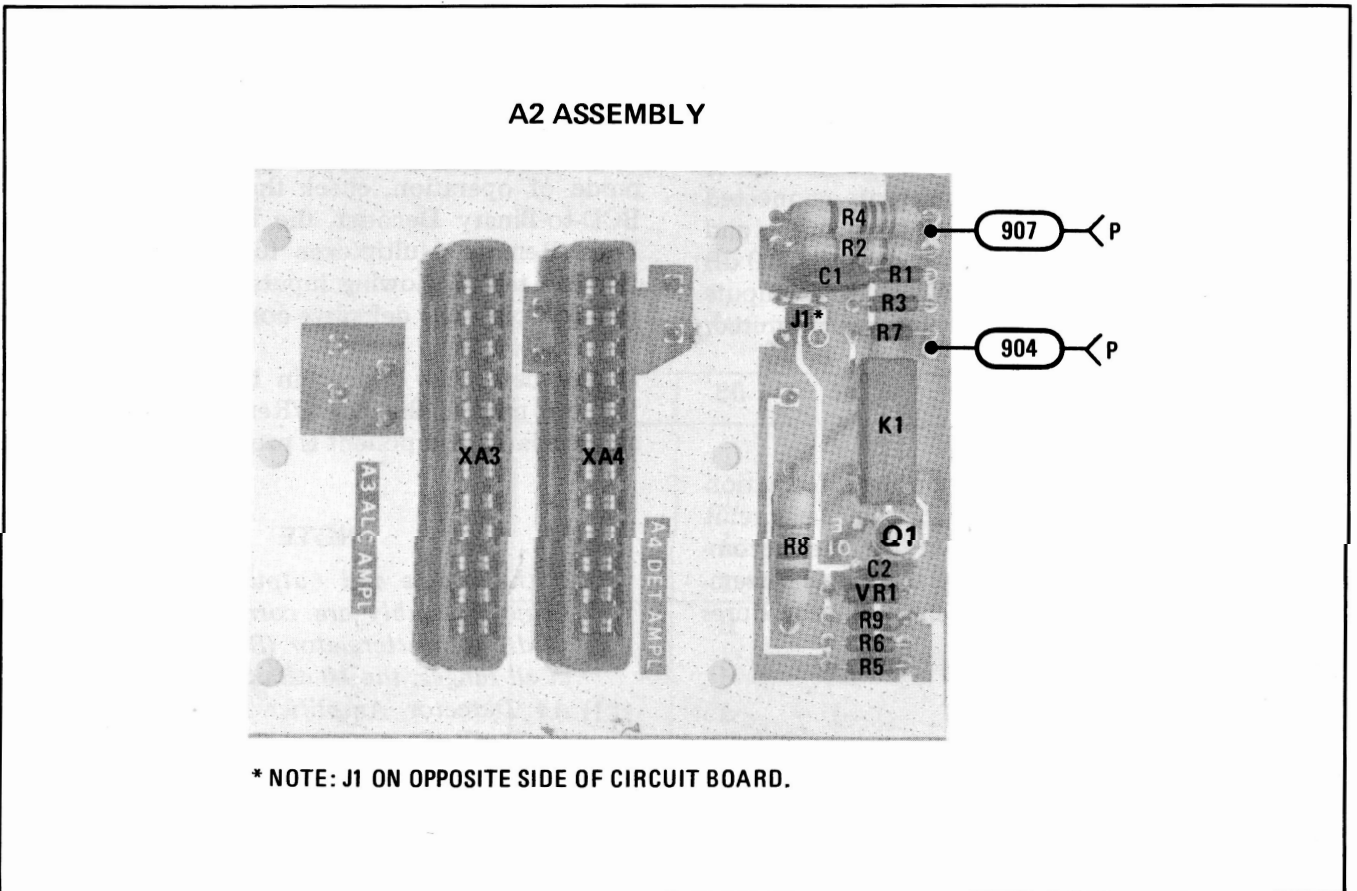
A2 ALC Mother Board Assembly Component Locations
